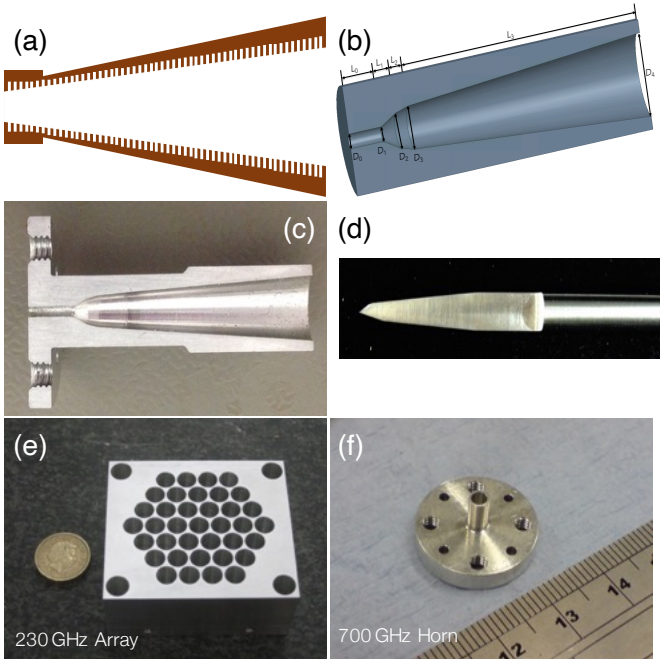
(a) Sketch showing the cross-section drawing of a corrugated horn. (b) Sketch of a multiple-flare angled smooth-walled horn. (c) Photo of a fabricated 230 GHz smooth-walled horn split into half to show the internal wall profile. (d) The drill bit used to fabricate a smooth-walled horn. (e) A fabricated 37-horn array using the smooth-walled horn technology. (f) A fabricated 700 GHz smooth-walled horn.
